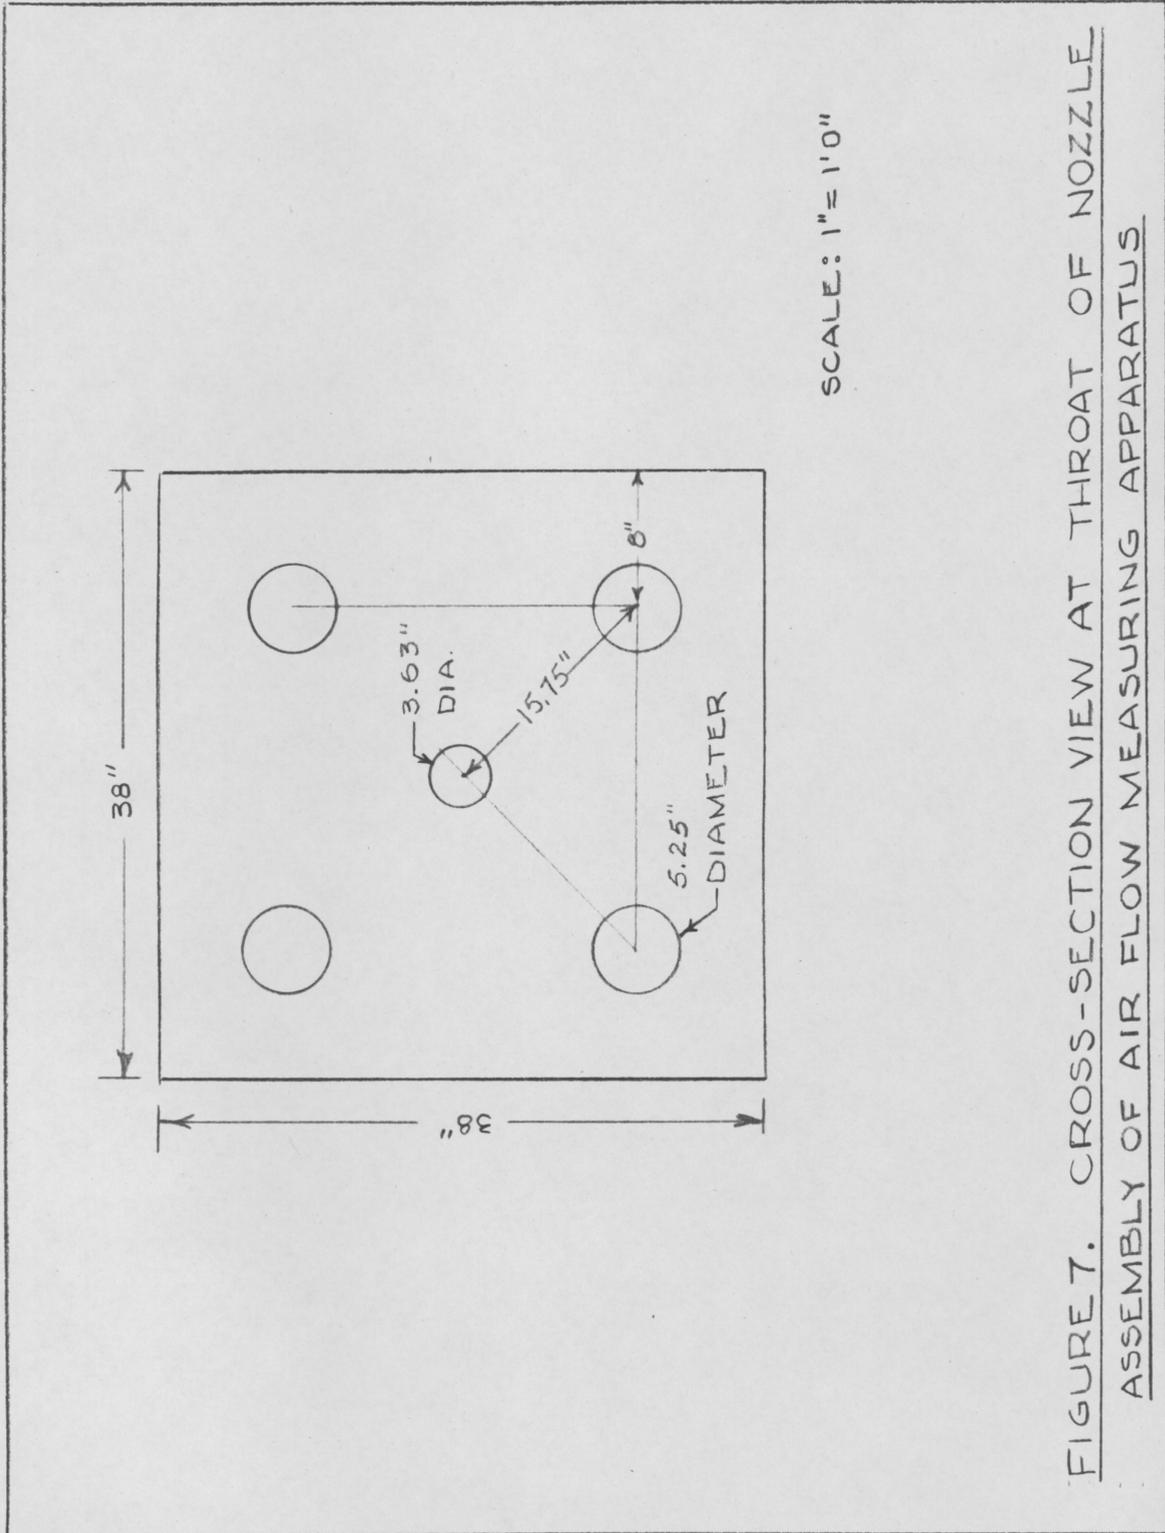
CROSS-SECTION VIEW AT THROAT OF NOZZLE ASSEMBLY OF AIR FLOW MEASURING APPARATUS
